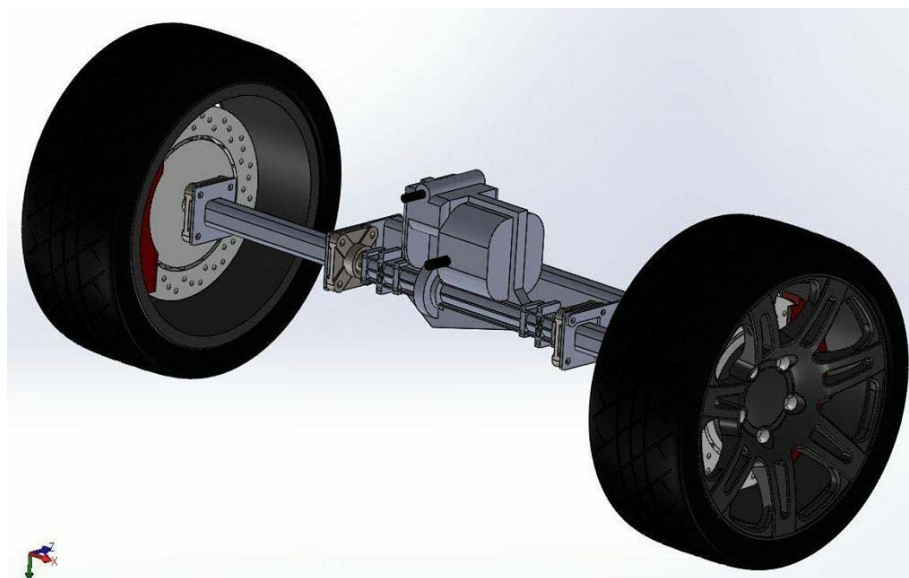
CAD render of finalized rear axle design including transaxle and axle shafts.
